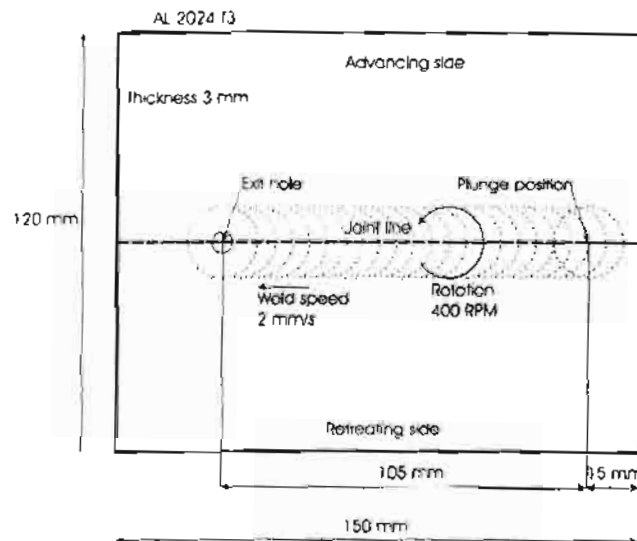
Work piece geometry and welding parameters [20]
